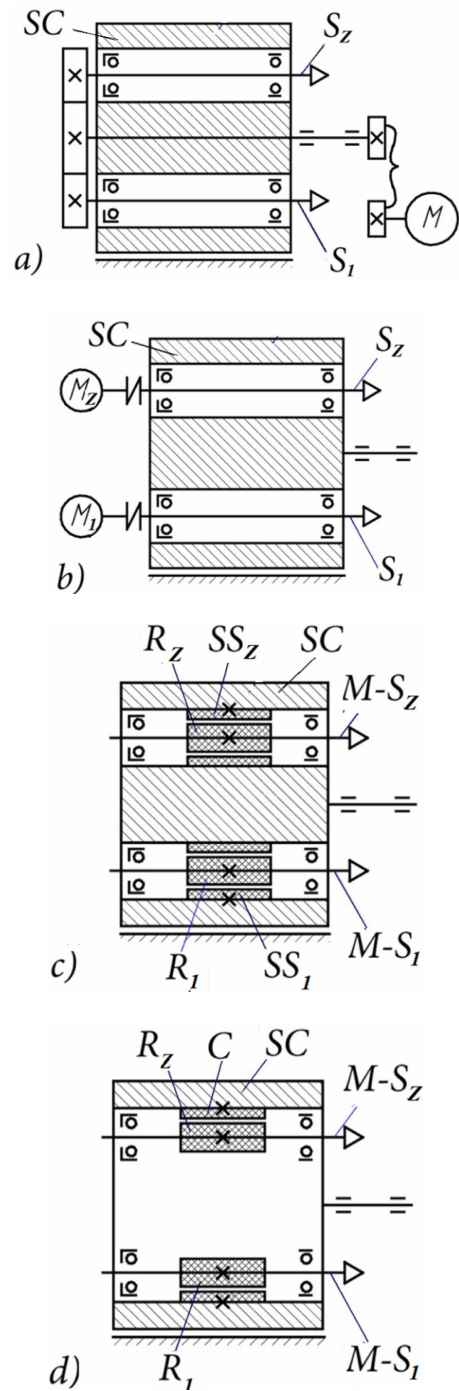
The evolution of the main drive motor (spindle rotation) in multi-spindle automatic lathe machine with a rotating spindle carrier (SC): a) – past; b) – present; c) and d) – future; M - main drive motors;  $M_1...M_Z$  – spindle drive motors  $S_1...S_Z$ ;  $M-S_1...M-S_Z$  – motor-driven spindles;  $SS_1...SS_Z$  – motor-driven spindle stators;  $R_1...R_Z$  – motor-driven spindle rotors; C – common stator for all M-S
